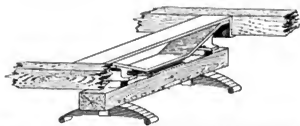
LONGITUDINAL ARRANGEMENT OF BOLSTER SPRINGS
